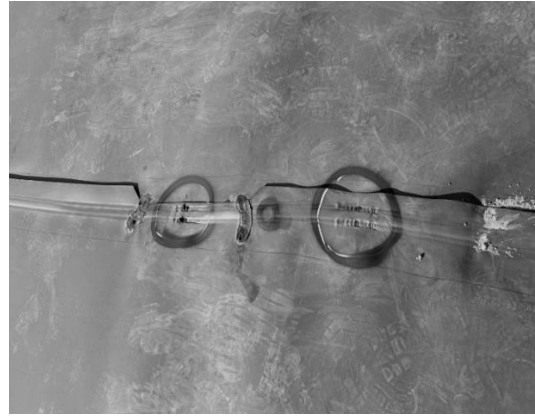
Burn out due to improper temperature control and inconsistent welding speed (fusion welding).
